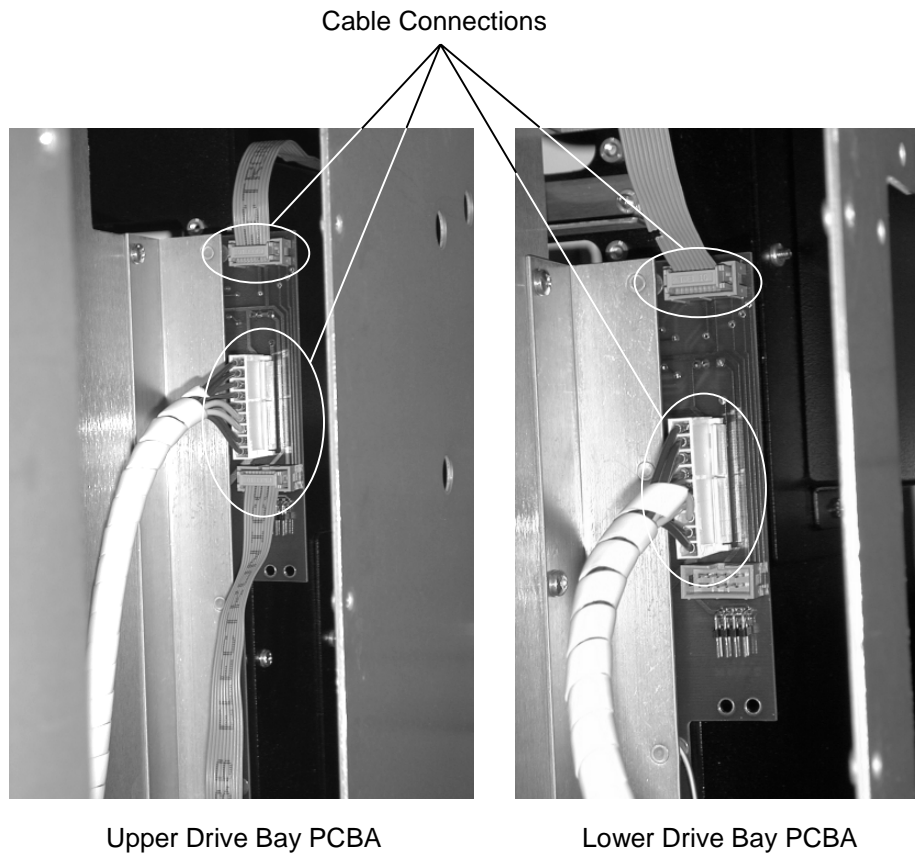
58xxx, 68xxx and 88xxx Models Right Side Drive Bay PCBAs
